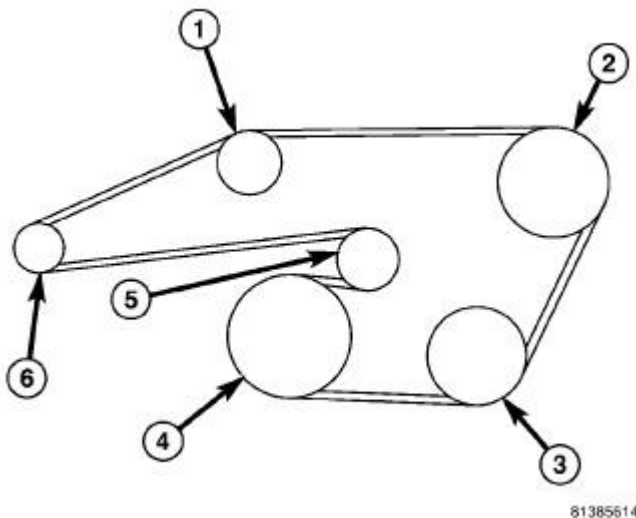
Identifying Accessory Drive Belt Routing - 3.5L
